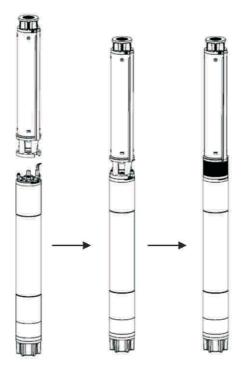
ASSEMBLING PUMP WITH COUPLING AND SUBMERSIBLE MOTOR
